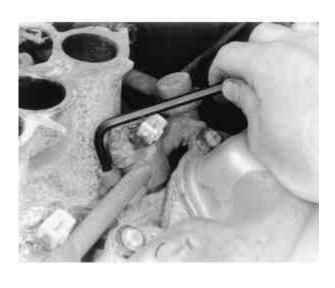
Remove the fuel rail assembly from the engine with the injectors installed
